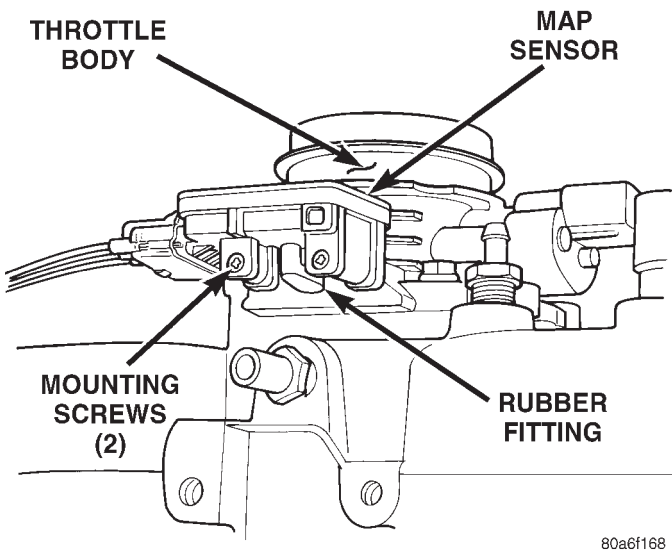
Rubber L-Shaped Fitting—MAP Sensor-to-Throttle Body
